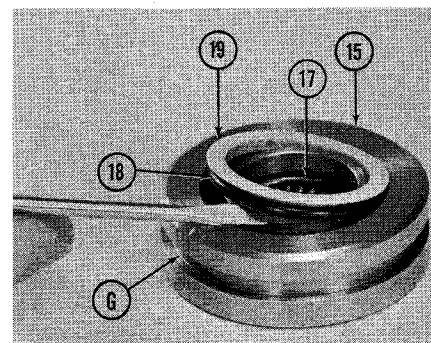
Lifting the Teflon rotor seal (19) and "O" ring (18) from bearing support (15). Needle bearing (17) is serviced separately from bearing support. Groove (G) is for support sealing "O" ring (16—Fig. 10). Identical seals (18 and 19) are used in pressure plate.
